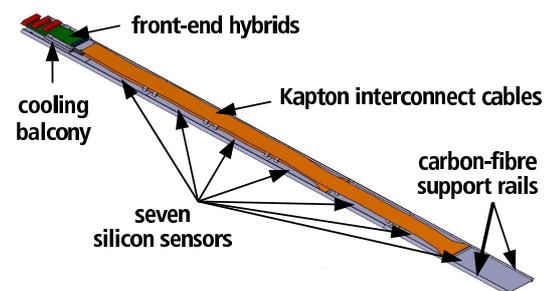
Isometric drawing of a detector module for the Trigger Tracker.
